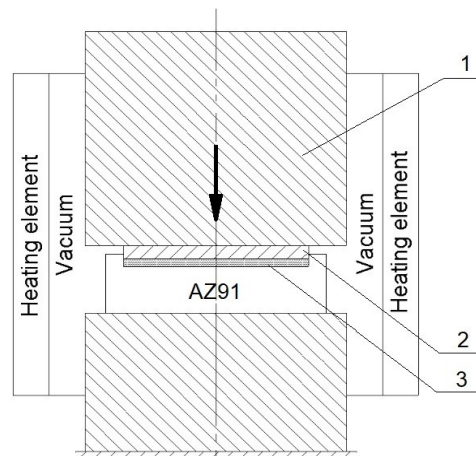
Experimental setup: 1 – main pressure pad, 2 – auxiliary pressure pad, 3 – pocket filled with AlSi10Mg powder
